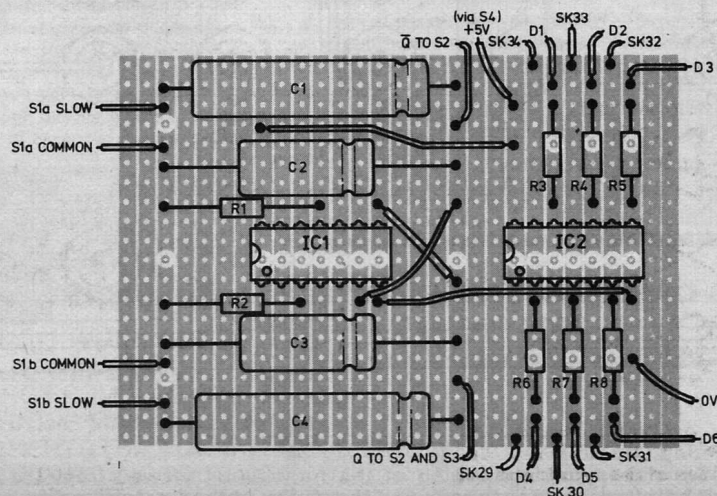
Component layout and Veroboard cutting details for the oscillator and i.e.d. drive circuitry
